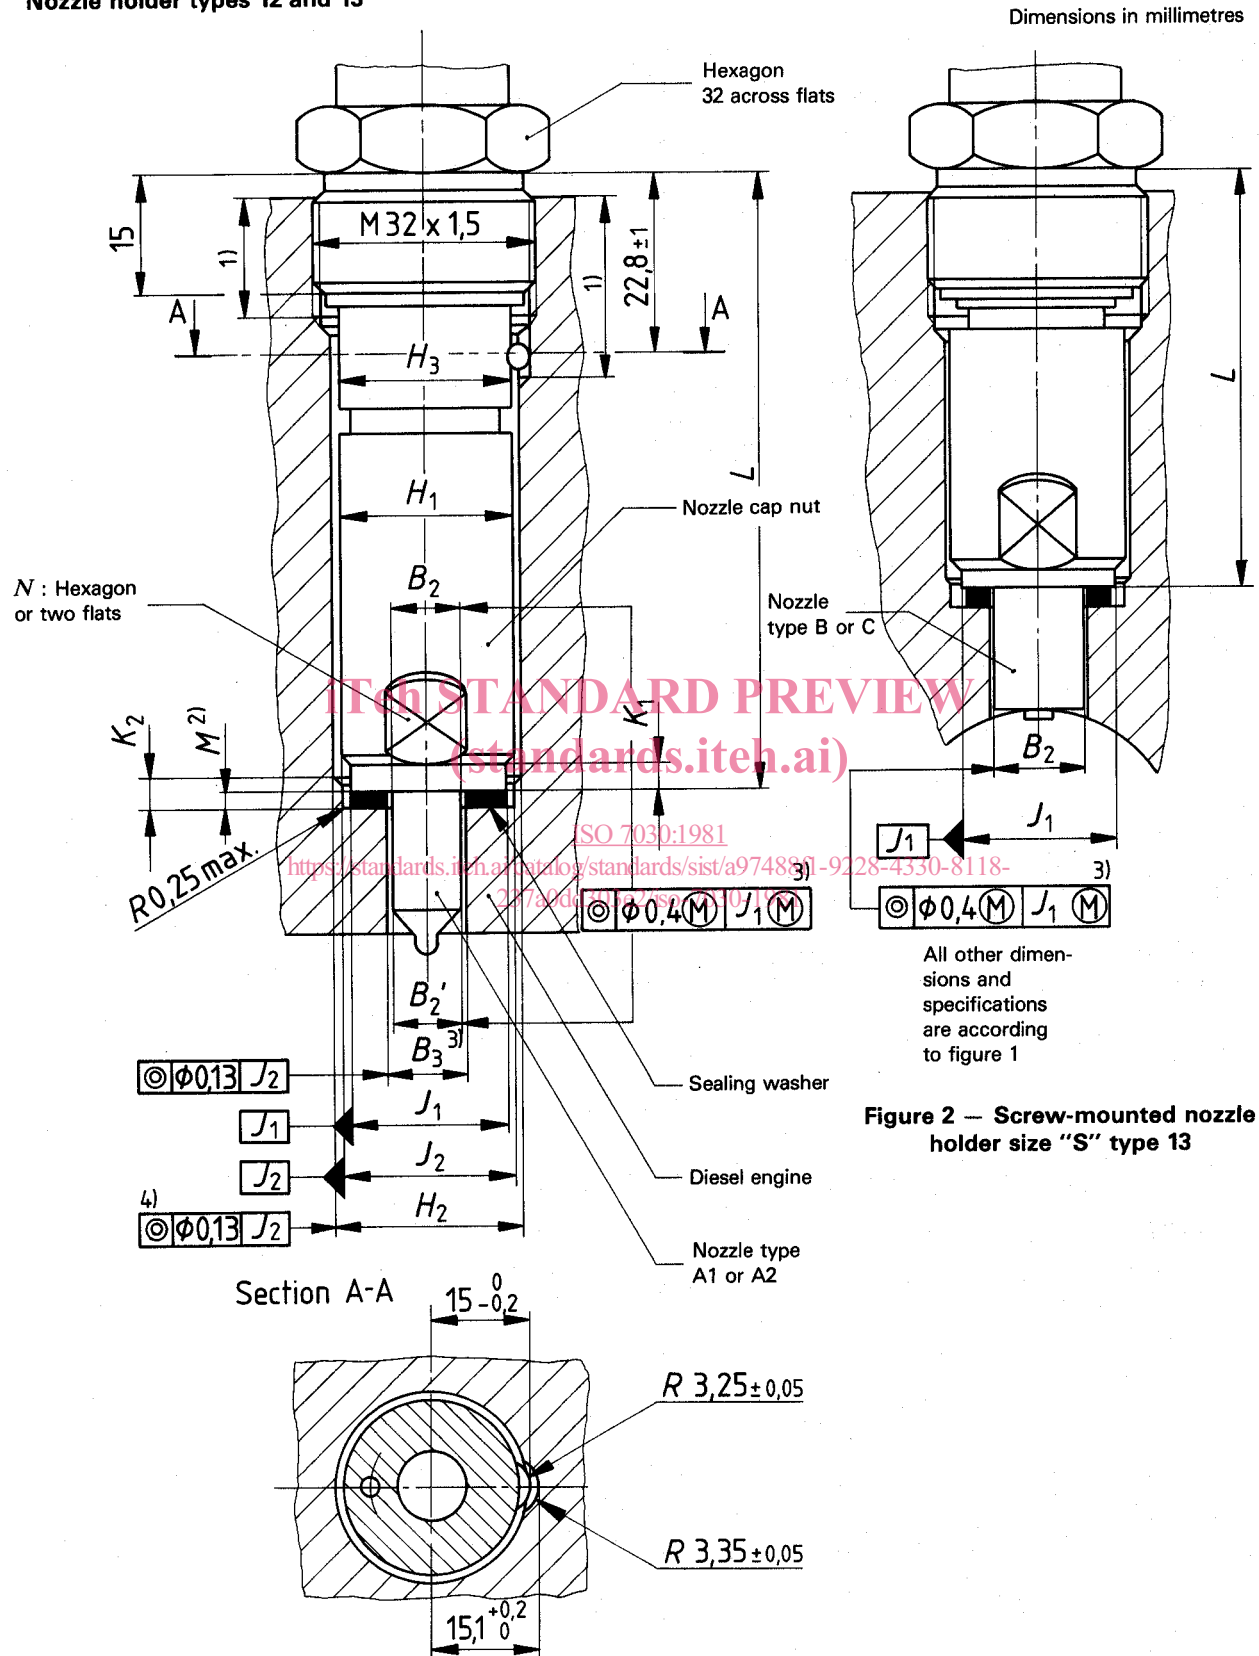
Screw-mounted nozzle holder size "S" type 12
